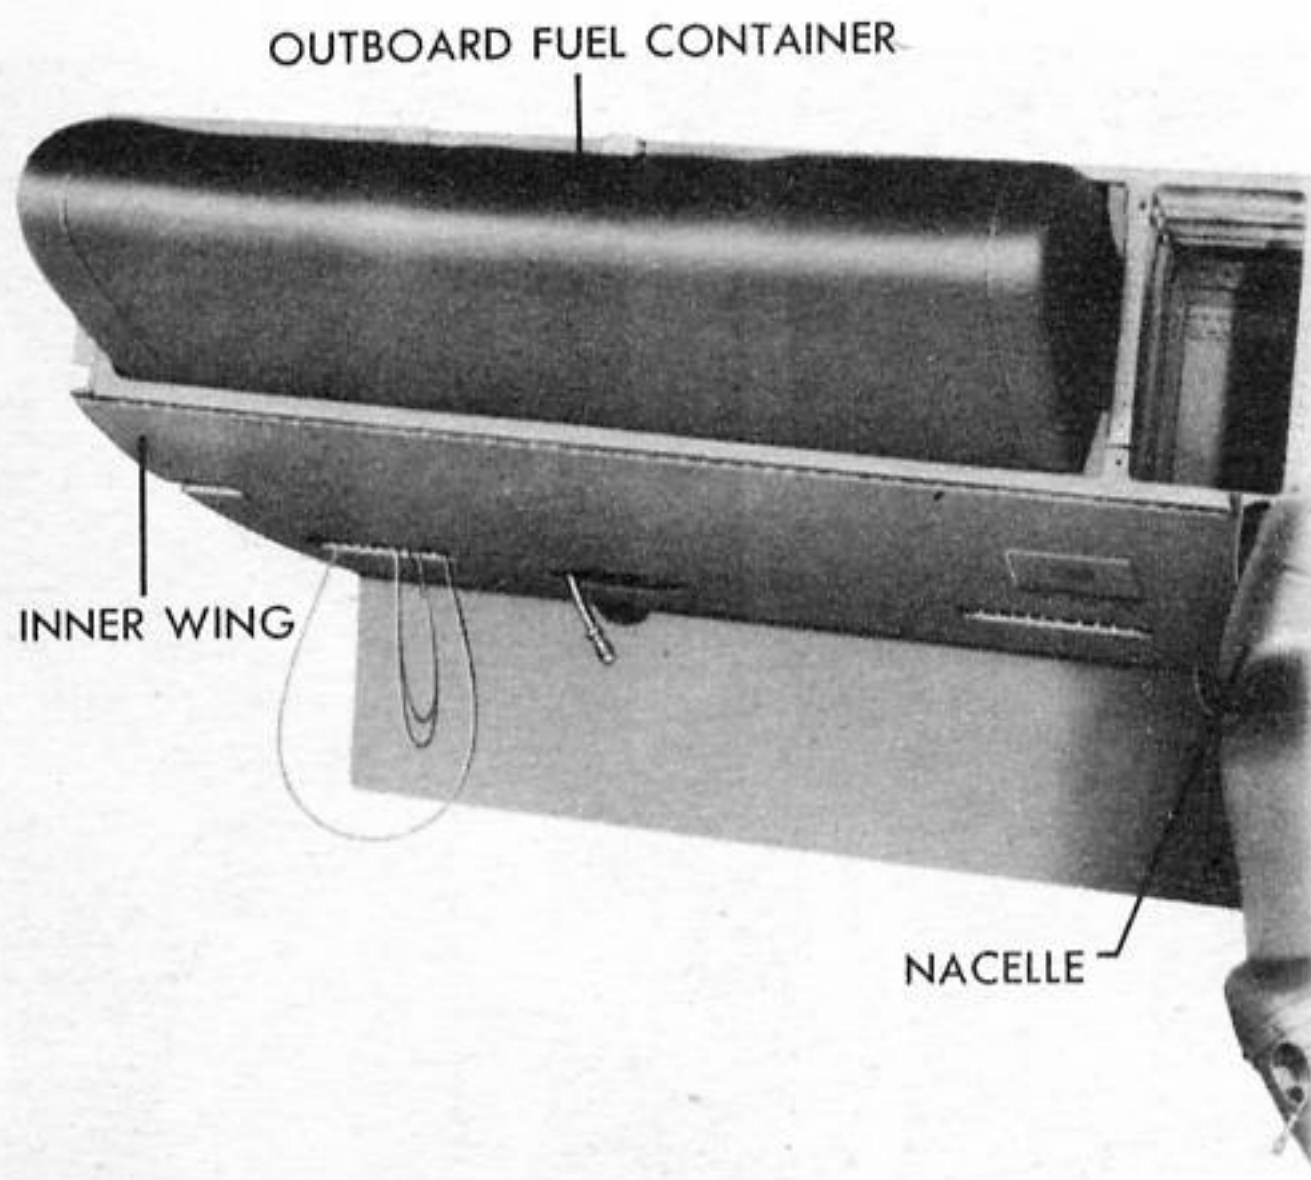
REMOVING OUTBOARD FUEL CONTAINER
